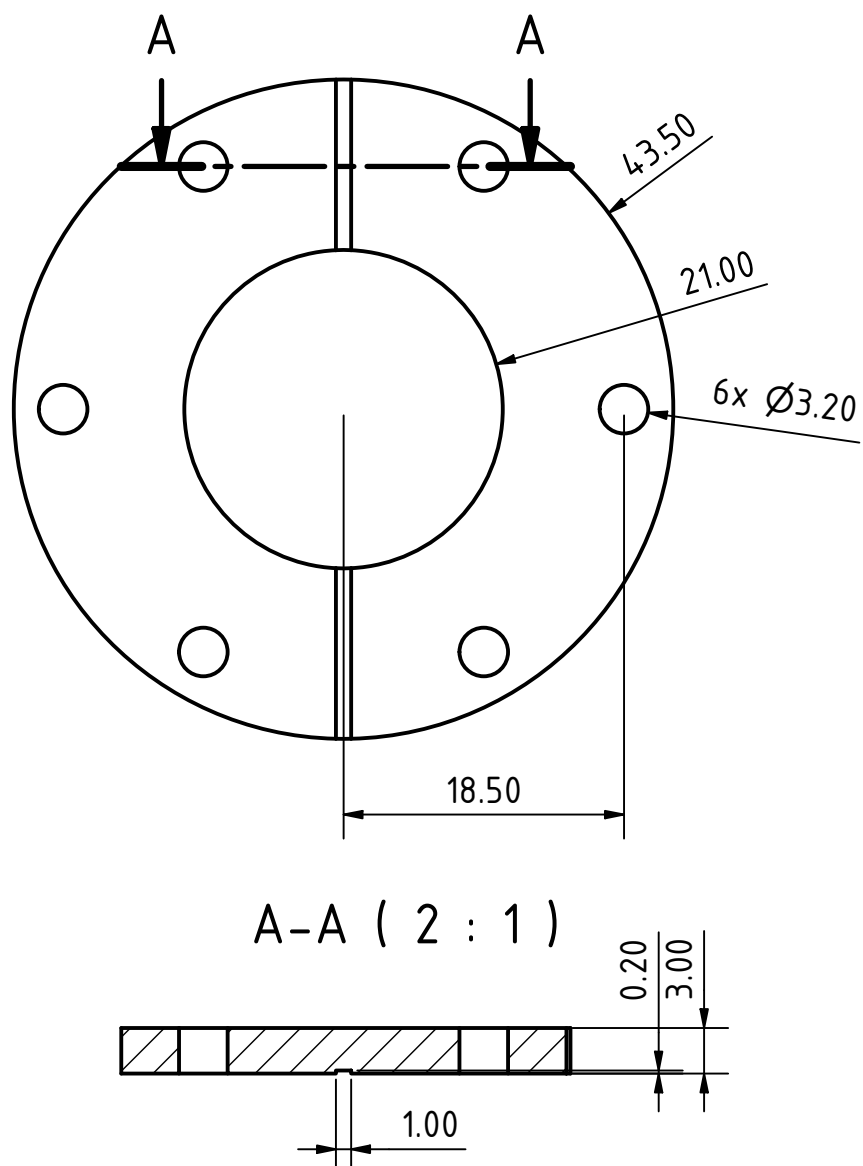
Technical drawing of the cover of the test valve: top view (top) and section view (bottom) with scale 2:1. All dimensions in mm.
